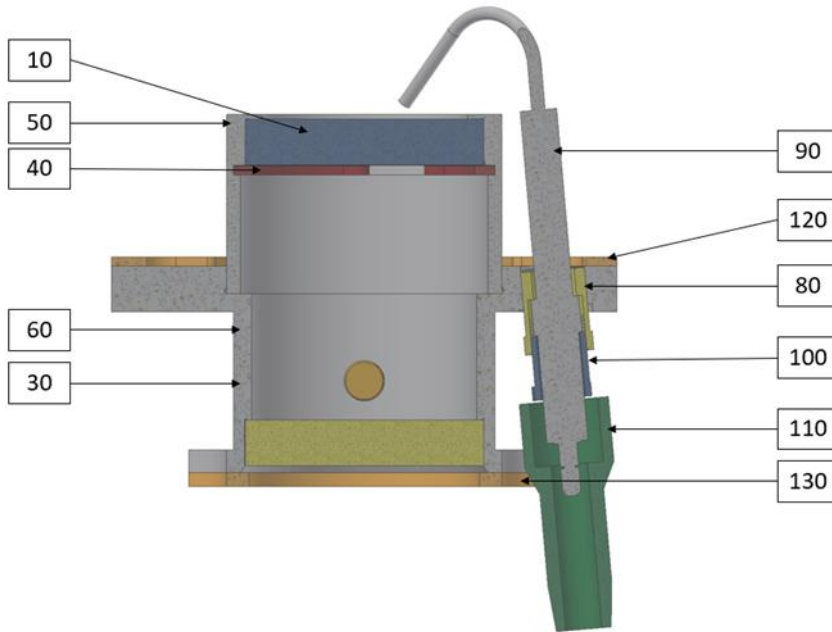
Structure burner head HEPM-BH-P-D040-H2
